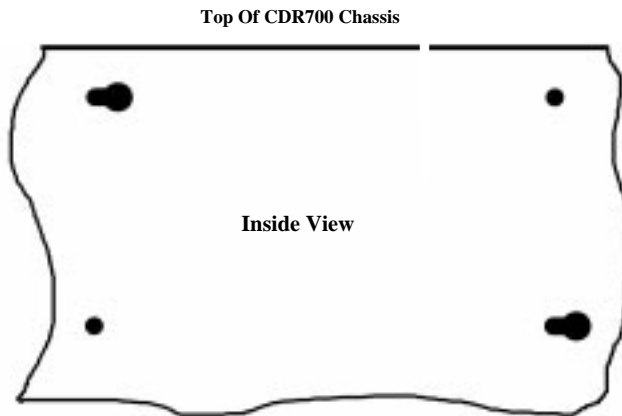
CDR700 Battery Revert Mounting Hole Pattern (Inside View)
